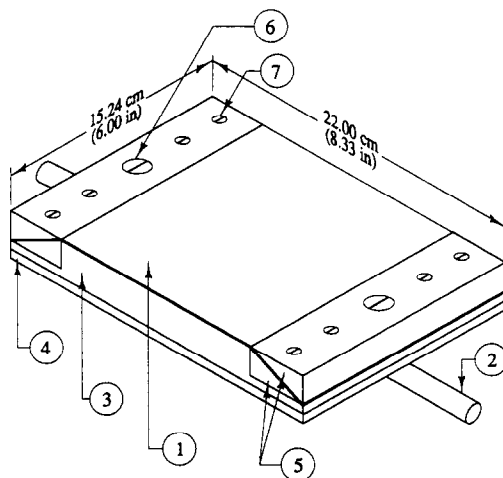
Test section assembly: 1, stainless steel foil; 2, support shaft; 3, Teflon insulation; 4, support plate; 5, bus bar; 6, brass bolt; 7, flat head brass screw.
